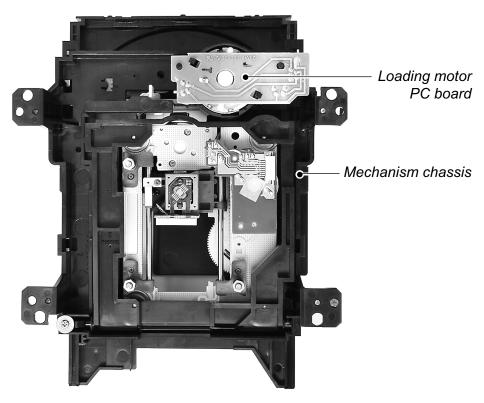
Mechanism chassis assembly (Bottom side)
